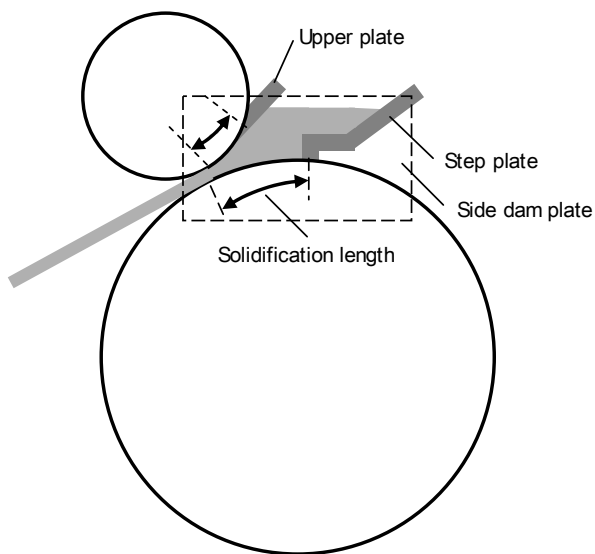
Schematic illustration of an unequal diameter twin roll caster
